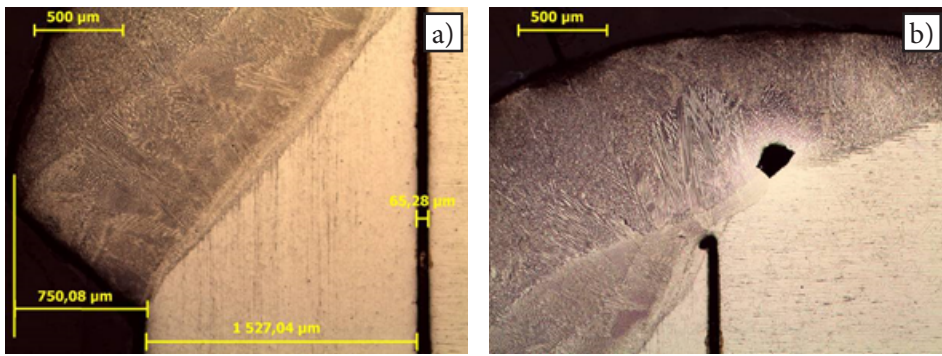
Welded joint: a) with the overlap and characteristic geometric dimensions, b) gas cavity in the area between the runs near the fusion line
